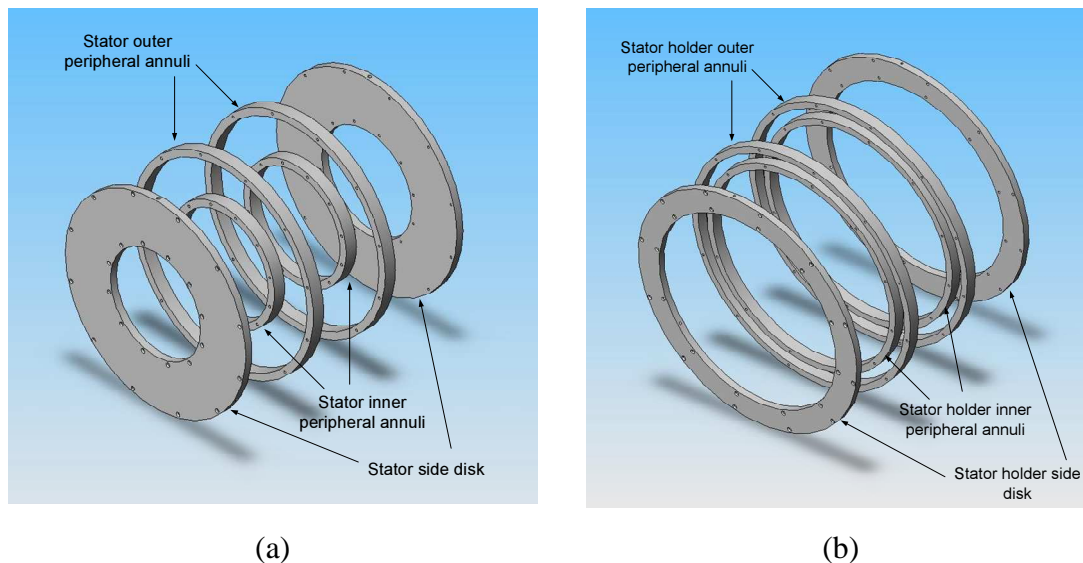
Stator (a) and stator holder (b) exploded views.
